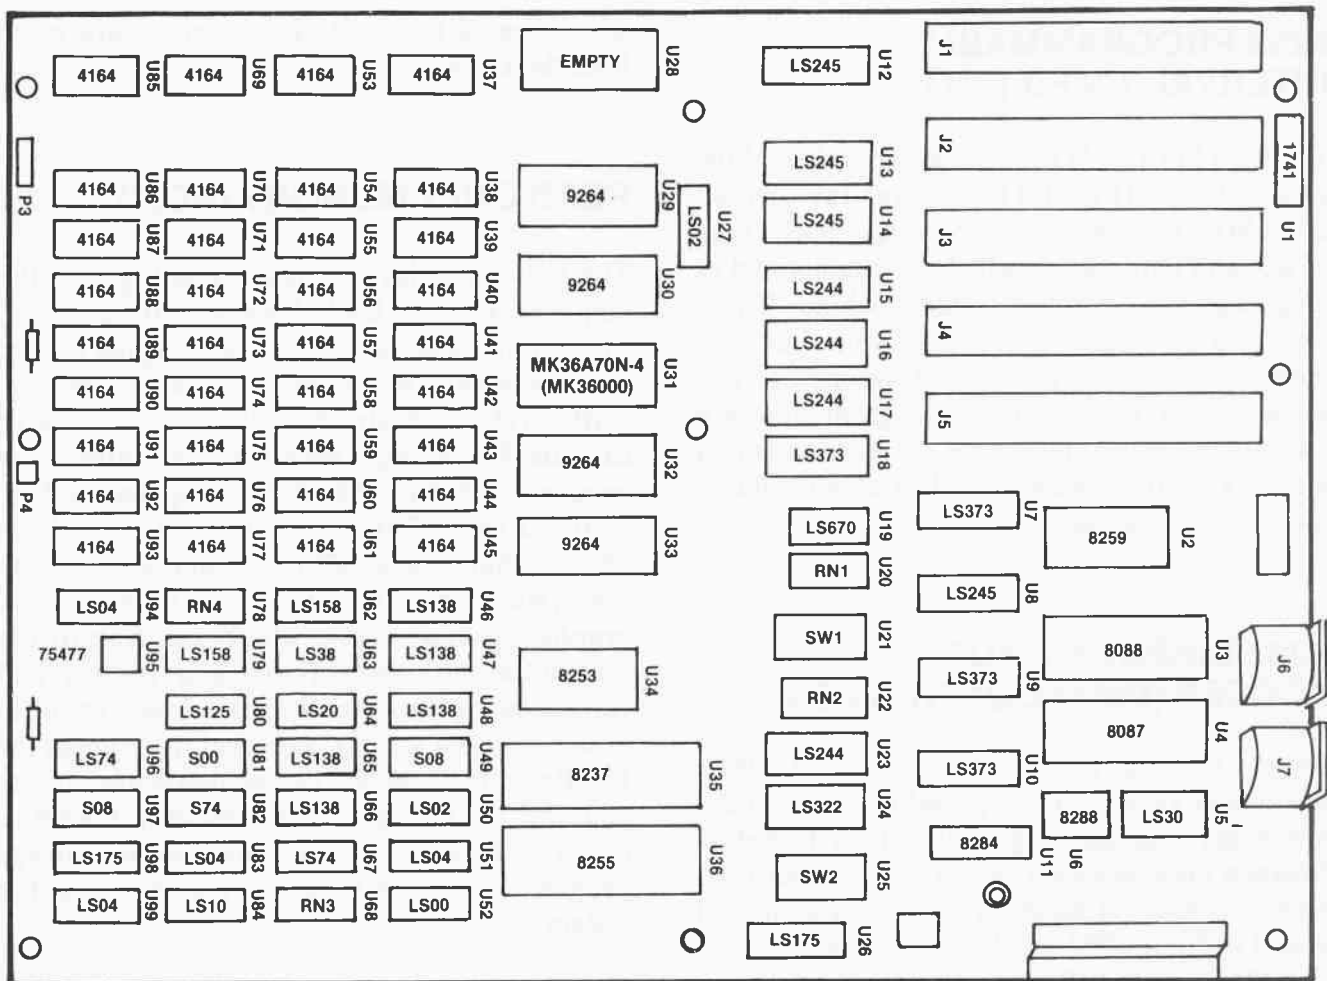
Photo of the 64K-256K IBM PC system board.
